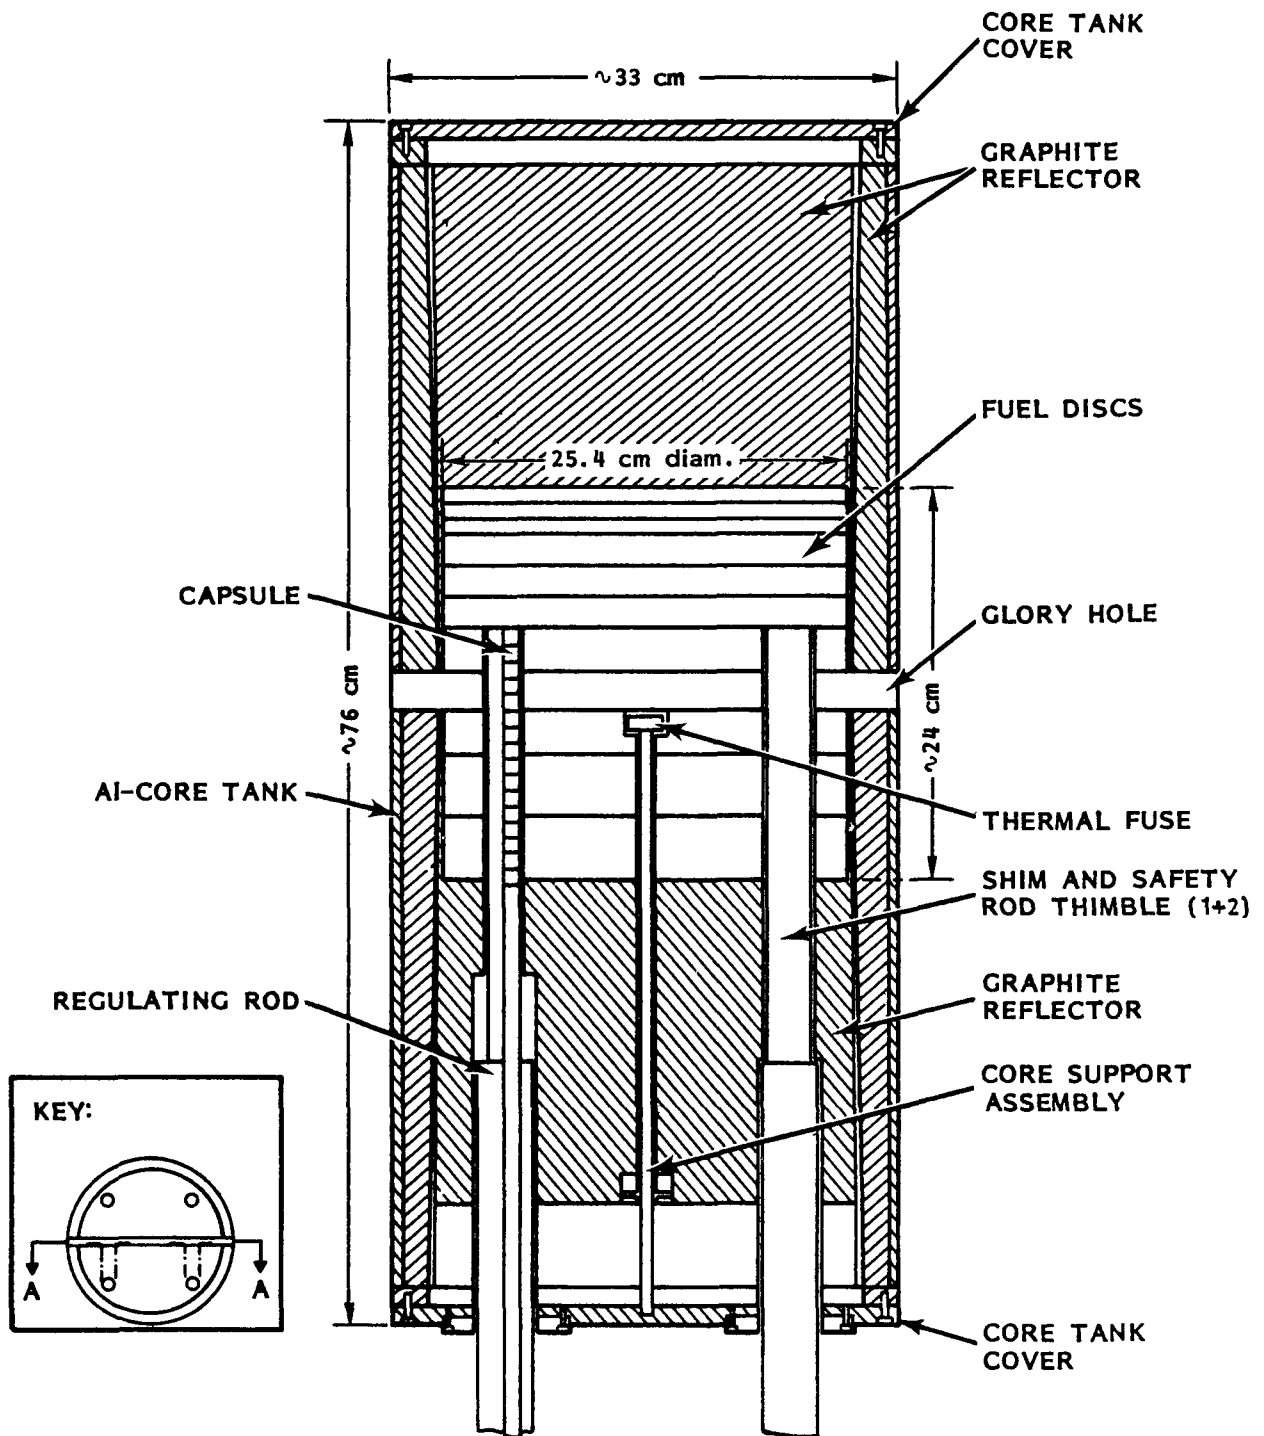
View A-A of the AGN-201 Core Tank Assembly
